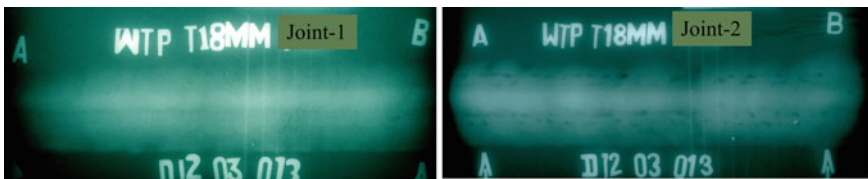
Solidification or hot cracks in joints, detected by radiograph test
